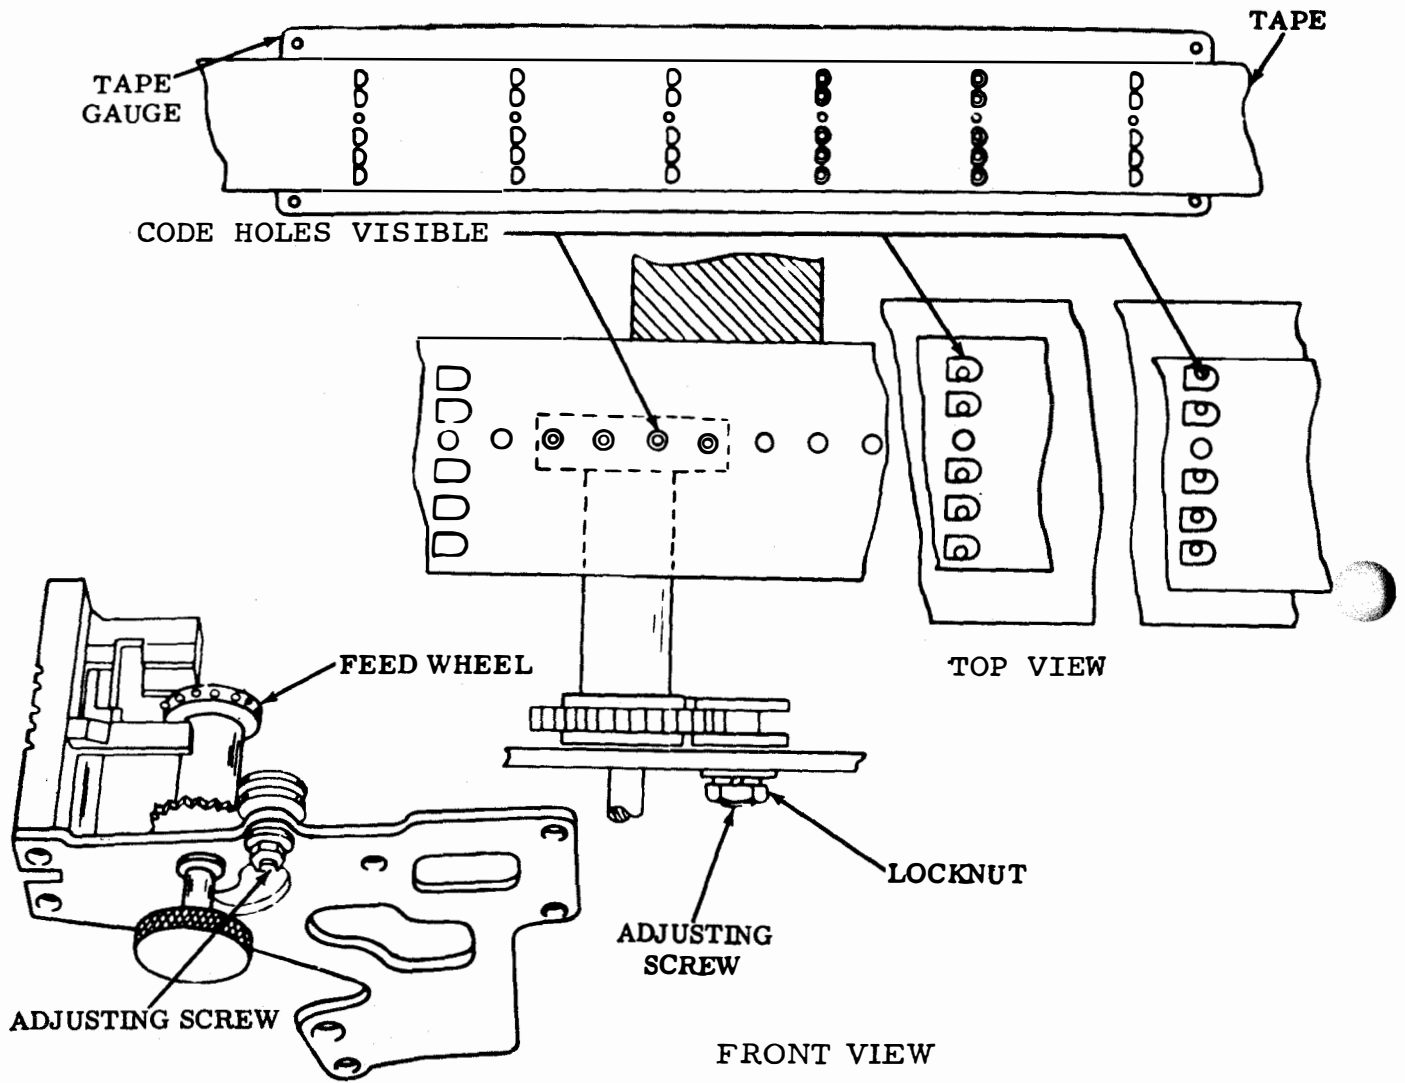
Feed Hole Lateral Alignment (Chadless Tape Mechanism)
